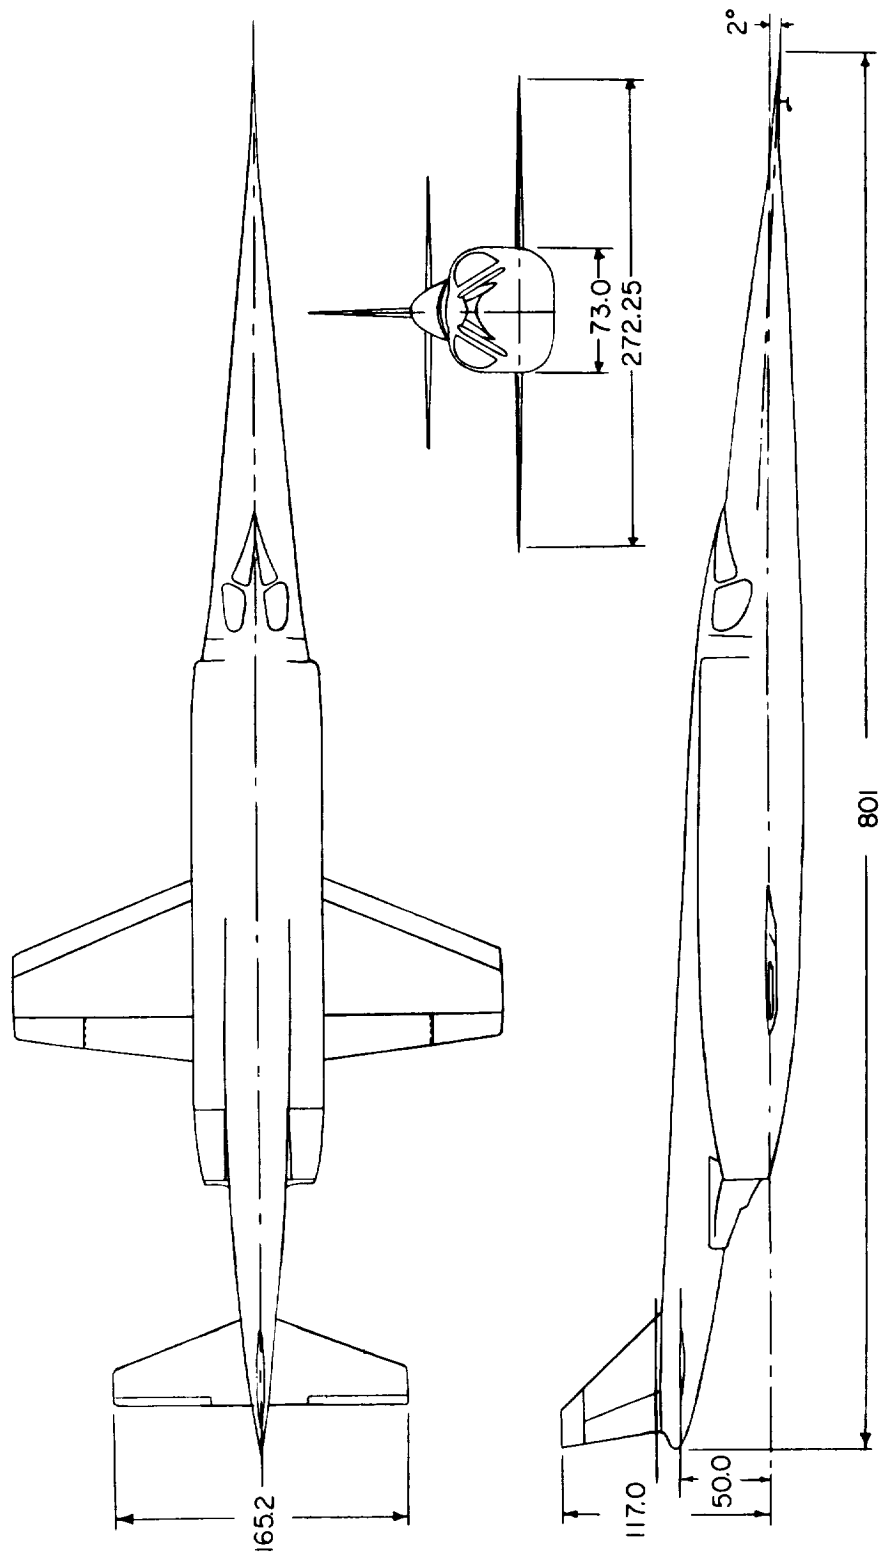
Three-view drawing of the X-3 airplane. All dimensions in inches.
